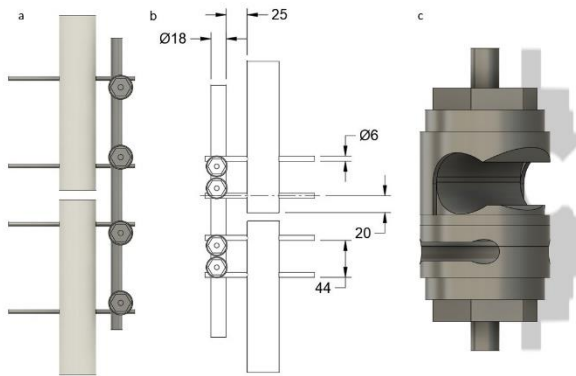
(a) 3D Model of the external fixator frame connected to the bone, (b) external fixator model dimensions (mm), and (c) closeup of the clamp design
